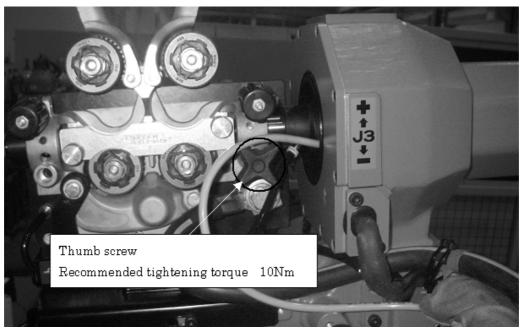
(j) Remove the thumbscrews of wire feeder
